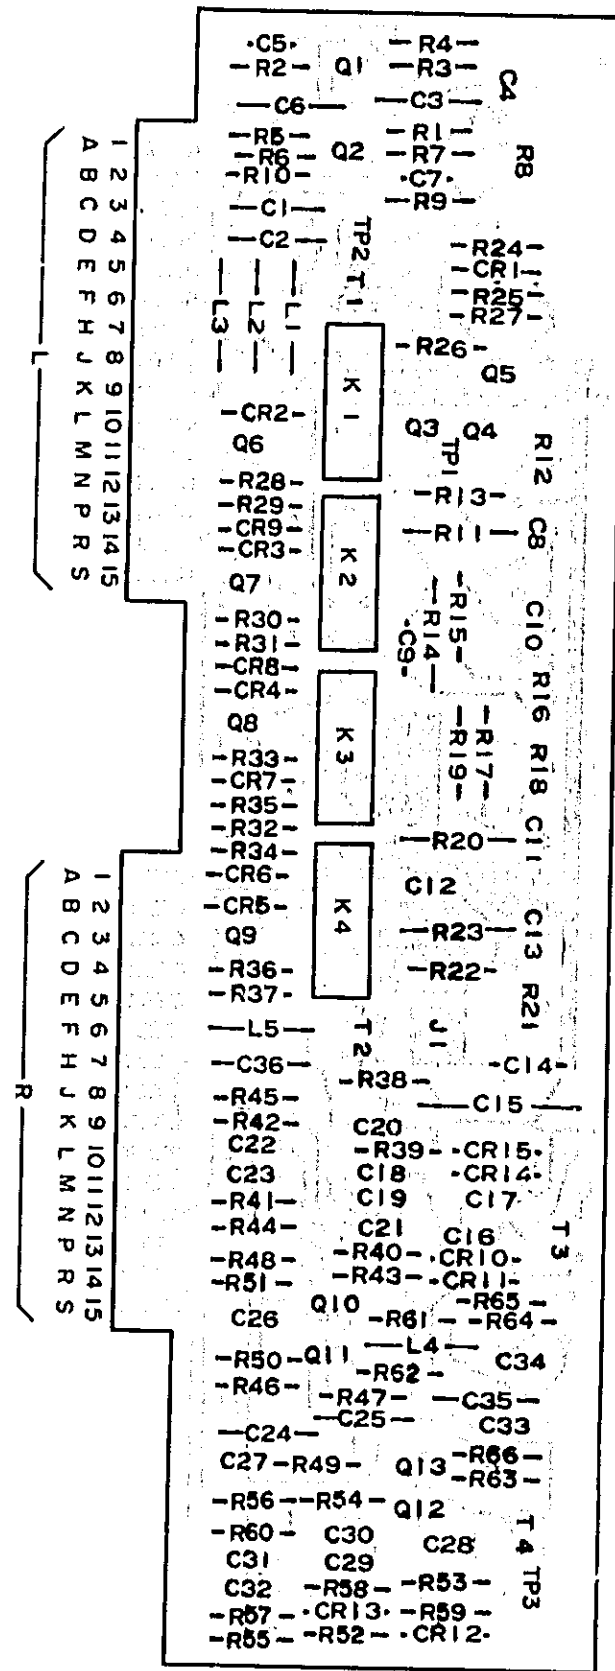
A12 Rs & Offset Board Assembly Component Locations.
